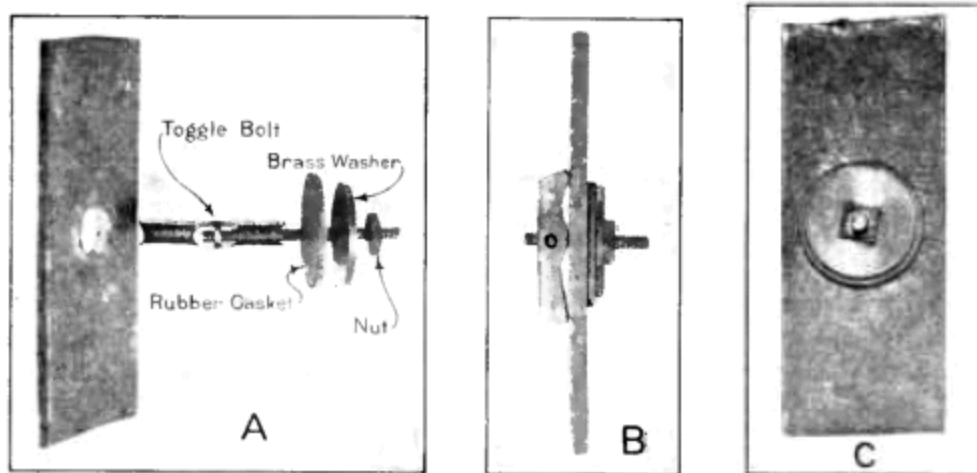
Home-made repairer; A, passing the link of the toggle bolt through the hole (enlarged) in the tank; B, side view of edge of tank with bolt, washers, and nut after being tightened; C, outside view of completed job.
